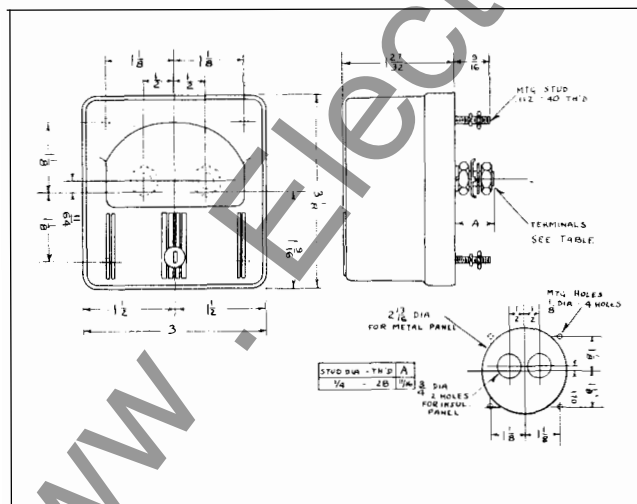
Outline and Driving Plan of the Projection Type Test Milliammeter. For Reference Only.
